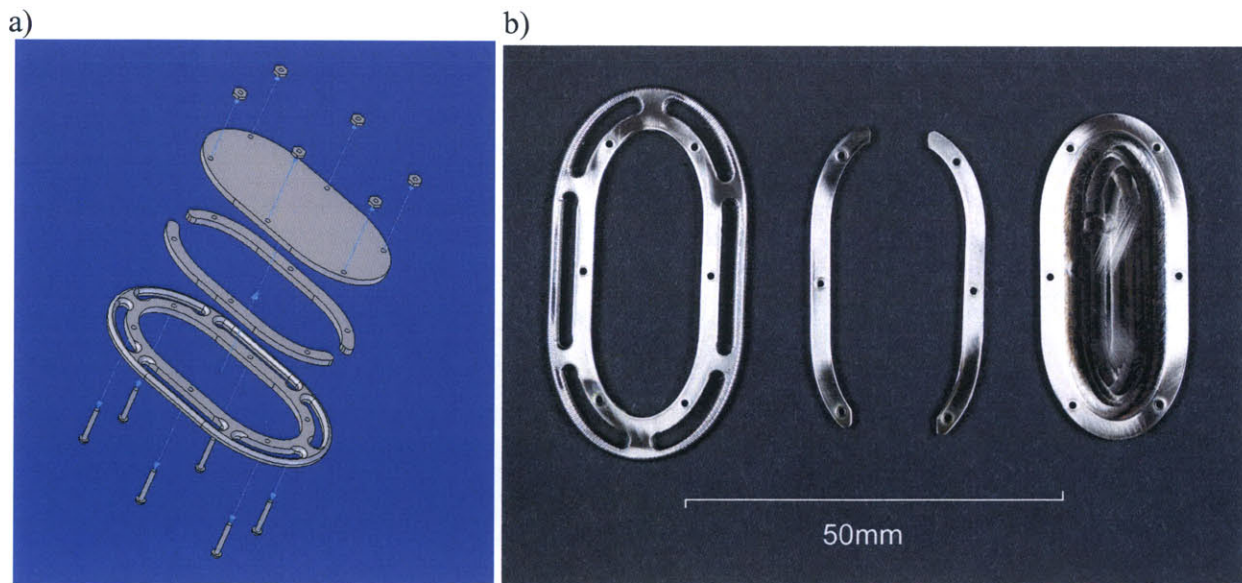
a) CAD assembly of Base Ring Version 2; b) Individual machined parts of Base Ring Version 2.
